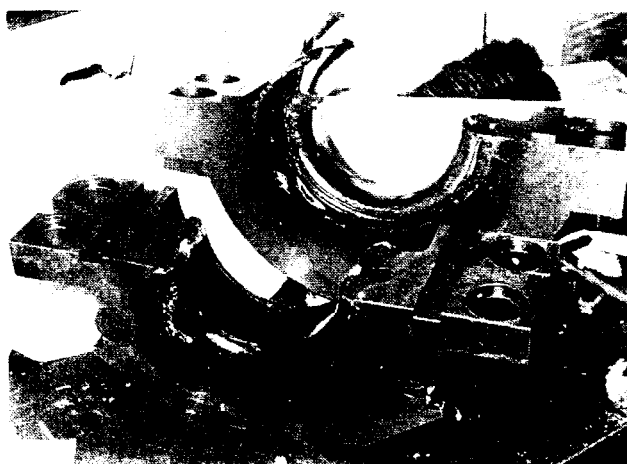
H.M.S. 'ZULU' JACKSHAFT BEARING HOUSING
